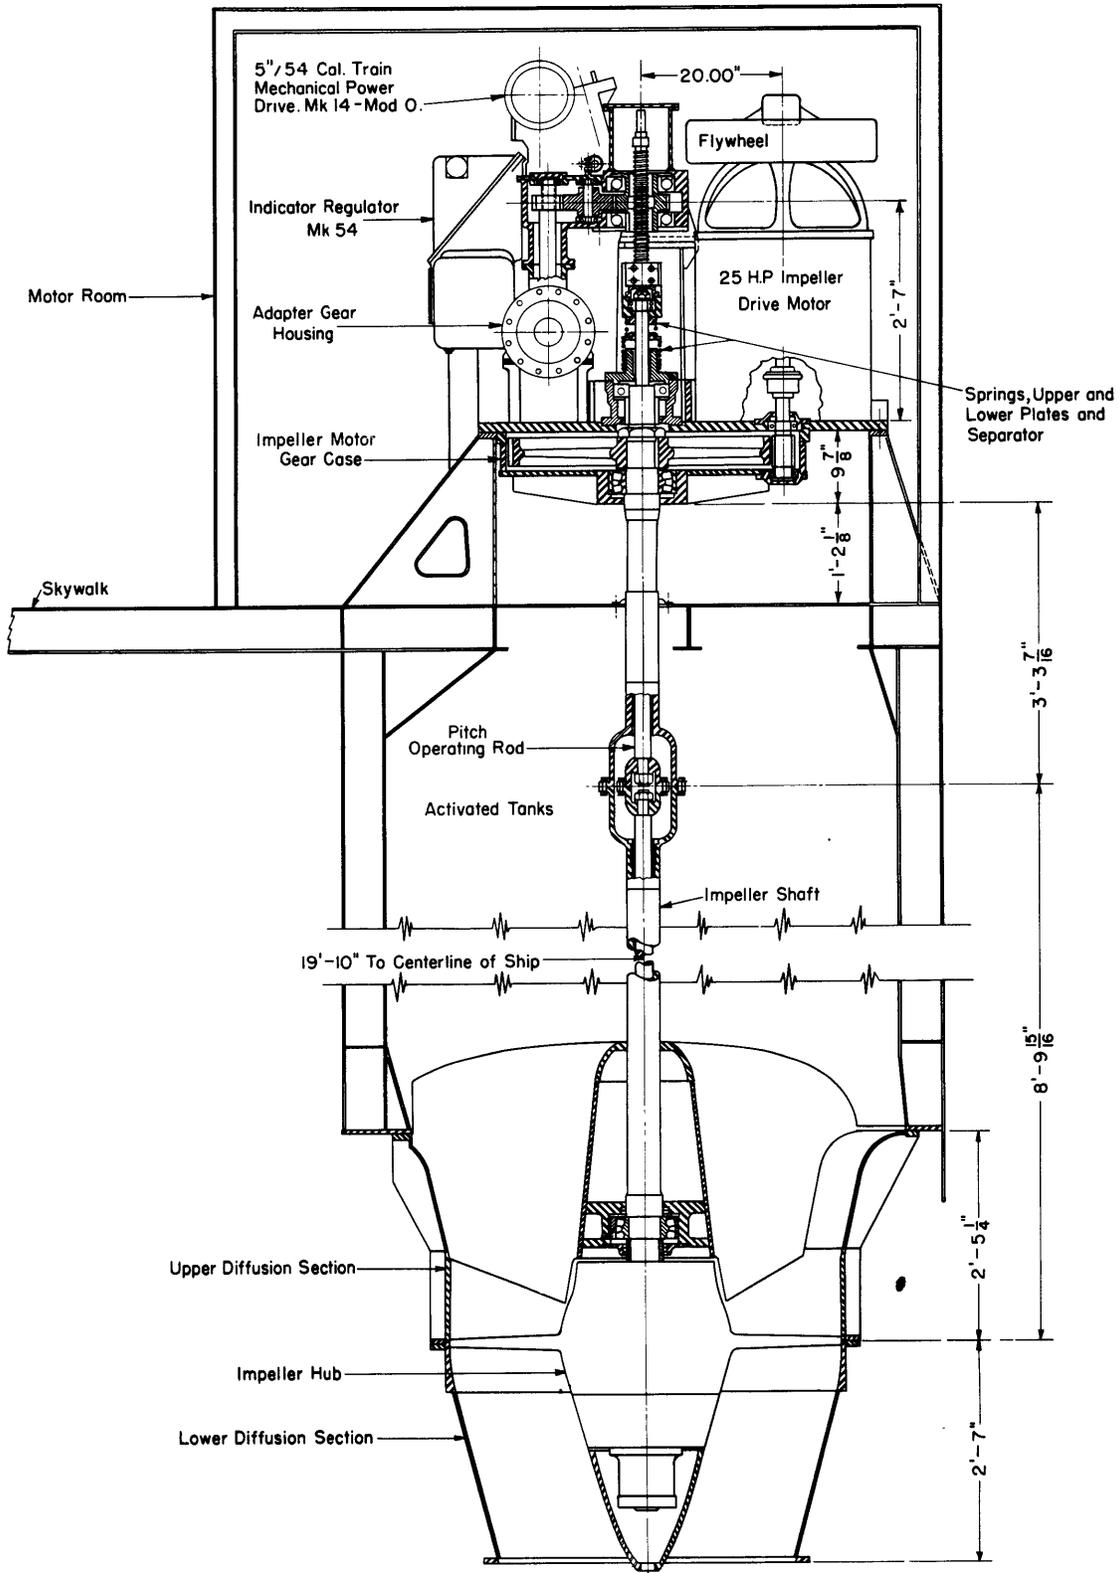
Sectional Diagram of the Tank Arrangement, Pumping and Pitch Mechanism, and the Impellers
